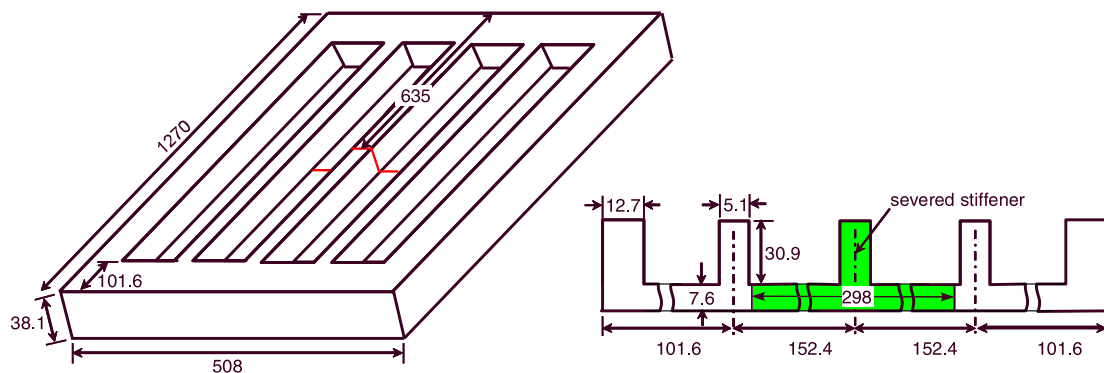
Five-stringer panel containing a crack that divides the central stringer. All dimensions in mm.
